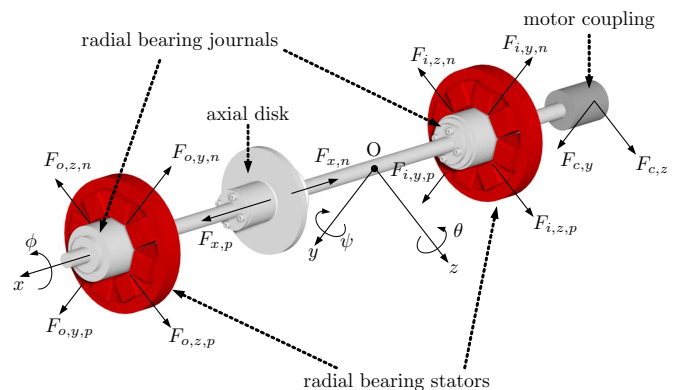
Shaft assembly, motor coupling and radial bearing stators for a five DOF magnetic bearing system.
